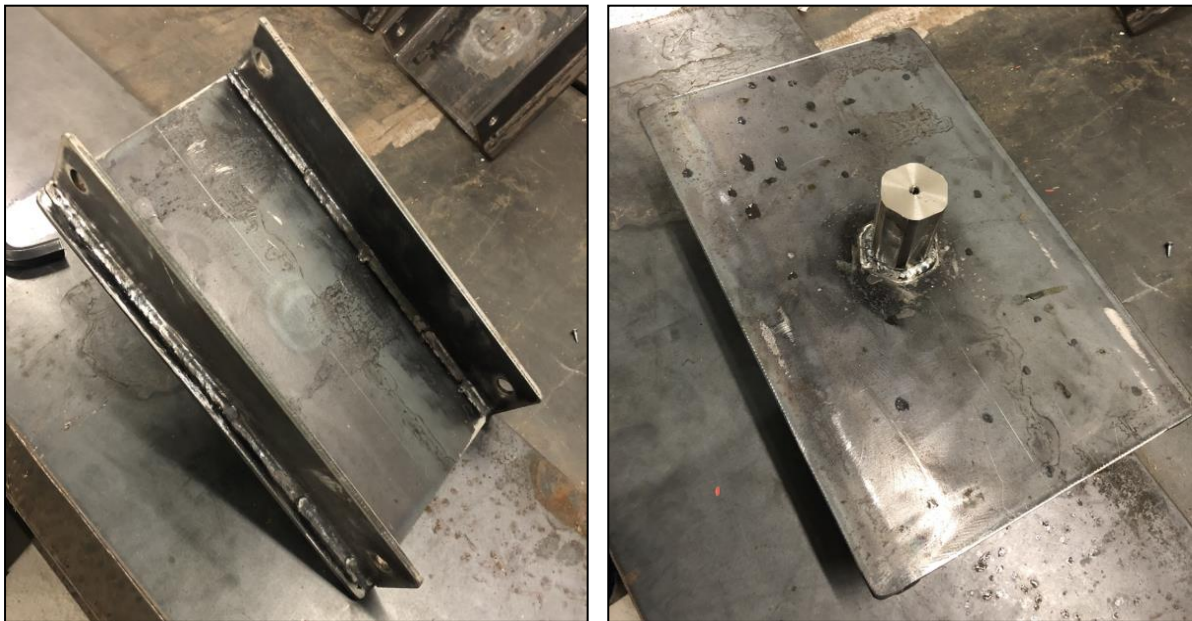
Steel clamp base unit; front (left), and rear (right) with hexagonal protruded fitment.
